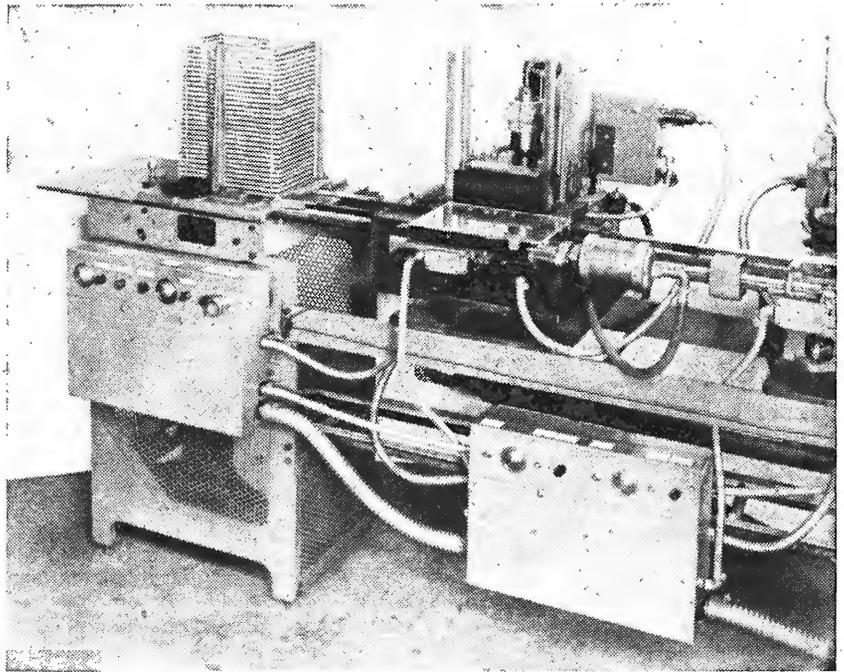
Loading end of the conveyor with stack of empty pallets and loading unit for mounting printed-wiring boards on pallets prior to component assembly.
